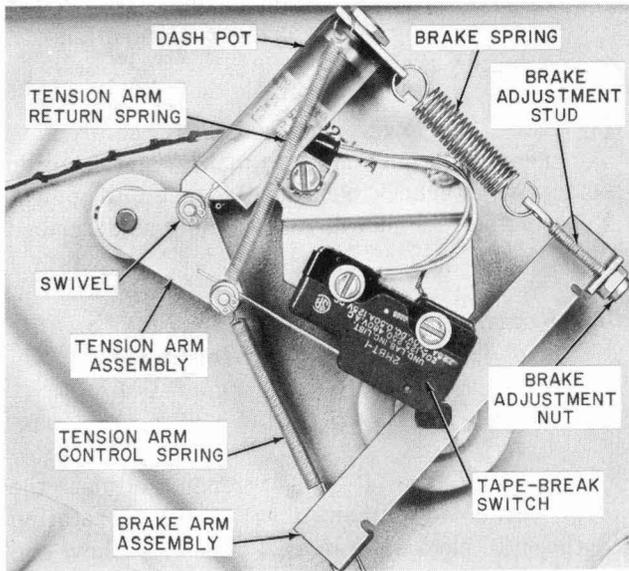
Rear Components of Supply Brake and Tension Arm Assembly
